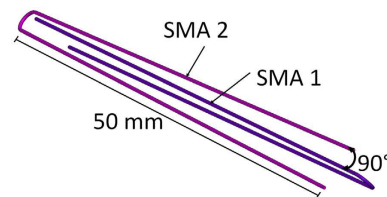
Wire arrangement inside the proof-of-concept prototype.<sup>[31]</sup>
